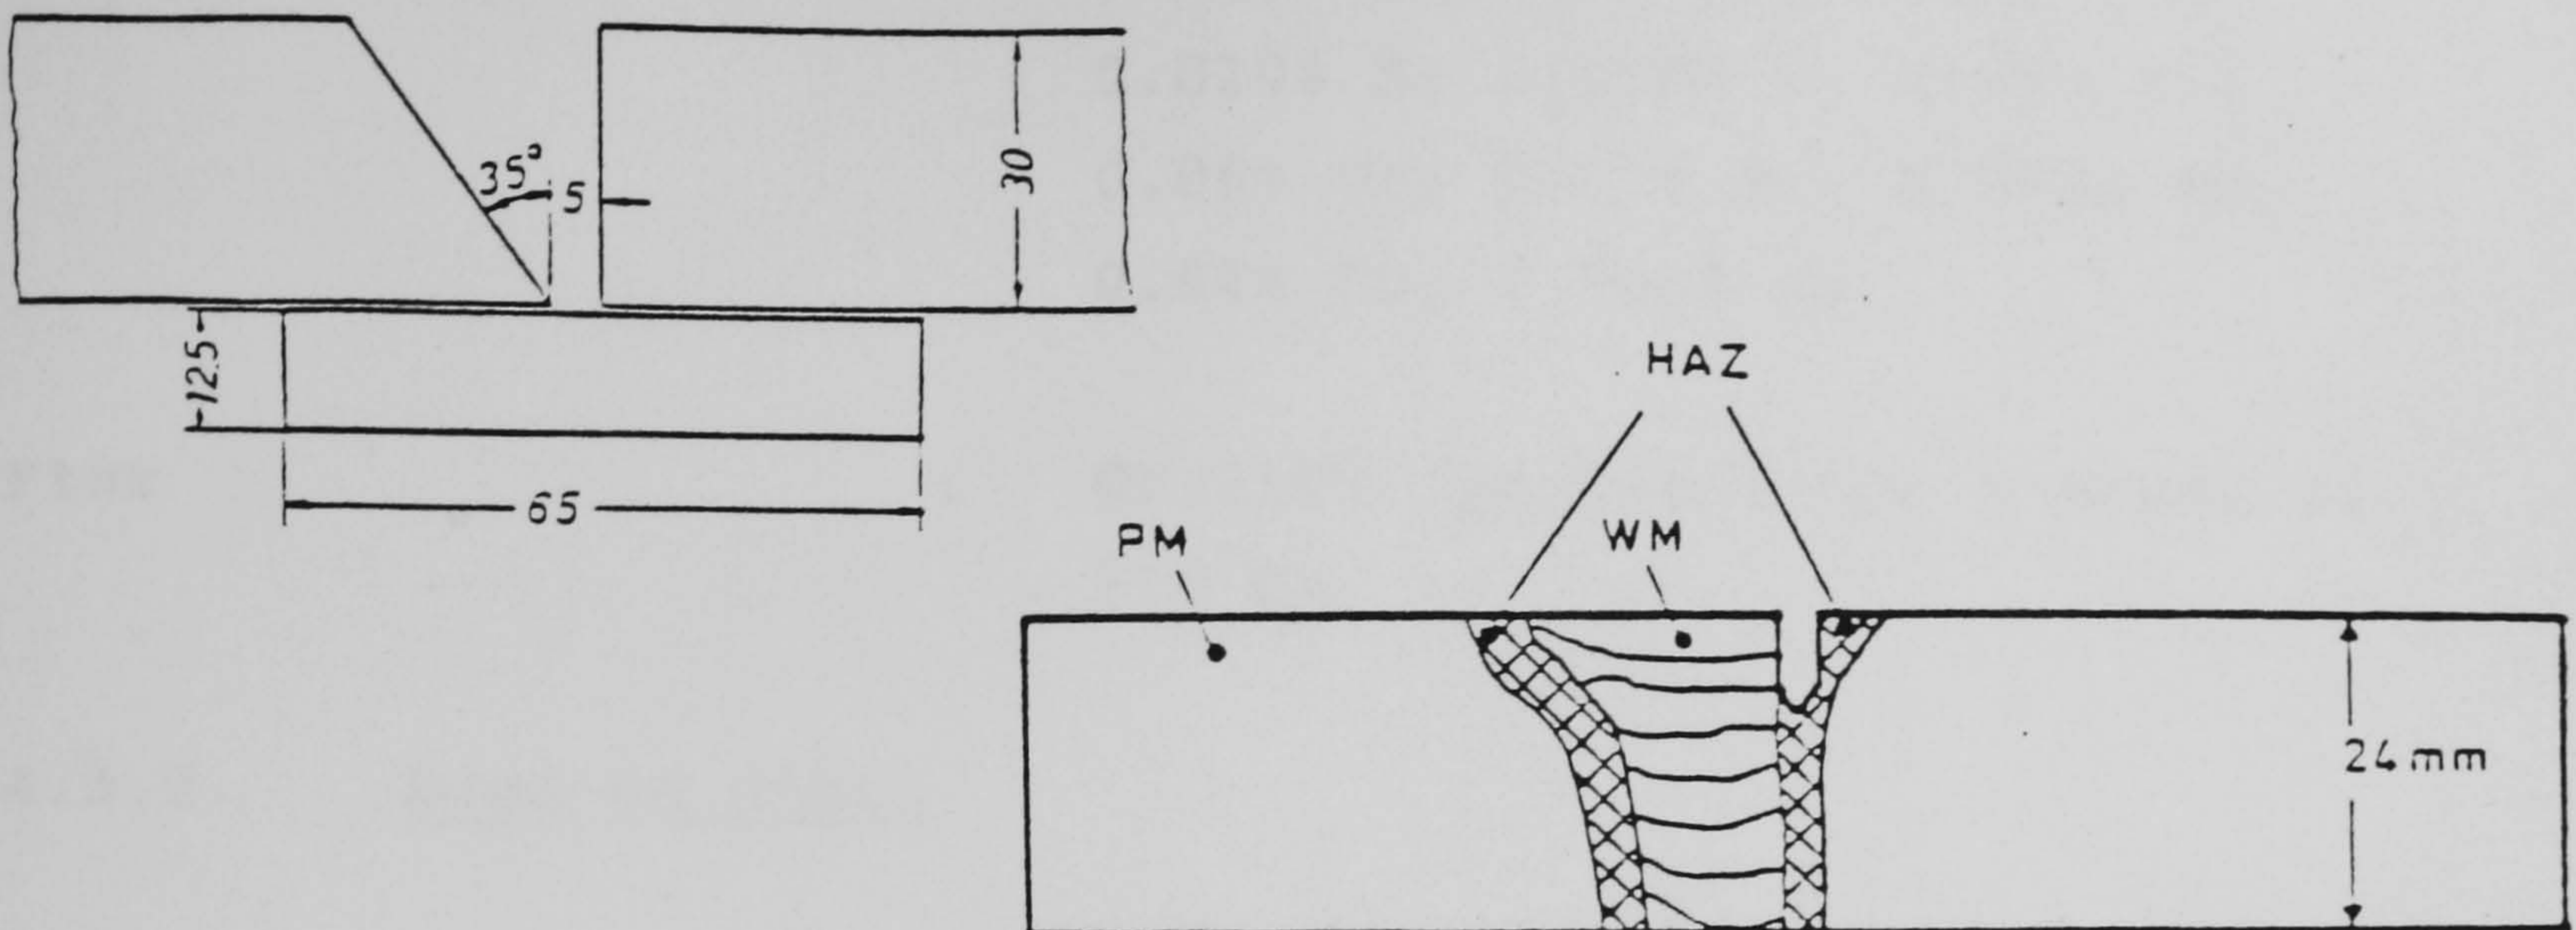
Asymmetric weld preparation and notch position with respect to the HAZ.
